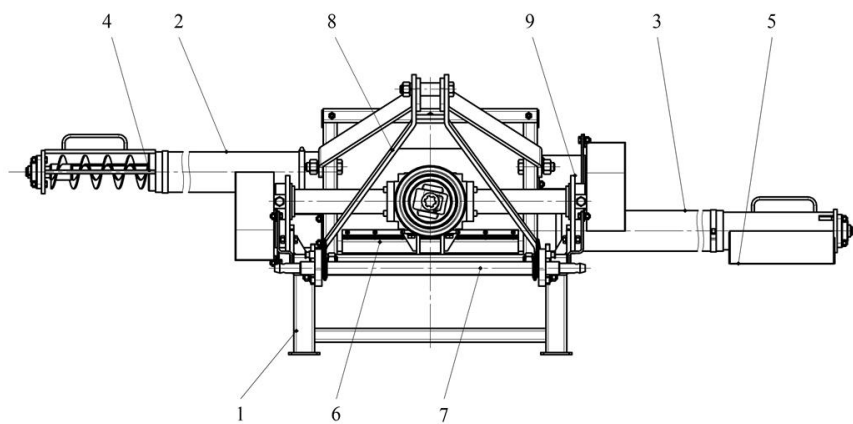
Schematic diagram of a device with a flexible screw conveyor: 1 – frame; 2 – loading line; 3 – unloading line; 4 – self-loading opening; 5 – unloading opening; 6 – transfer pipe; 7 – intermediate shaft; 8 – lower bracket; 9 – upper bracket
